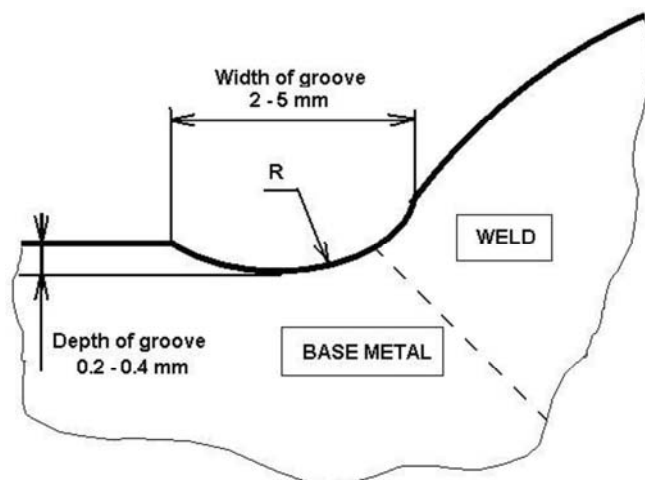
Profile of weld toe improved by Ultrasonic Peening [1]
